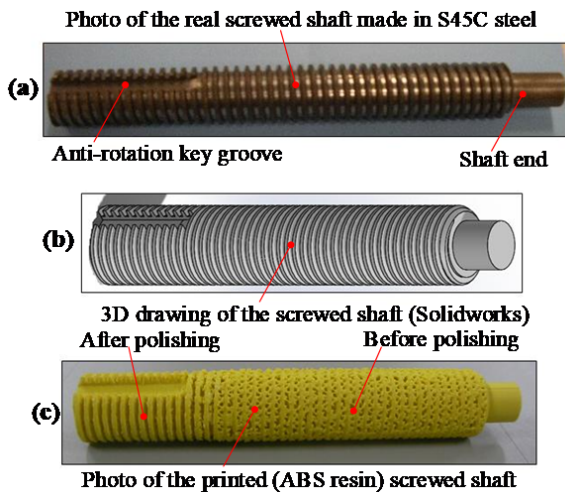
(a) Photo of the real shaft, (b) 3D drawing of the output shaft, and (c) photo of the 3D printed shaft in ABS resin, illustrating the design process of the output screwed shaft
